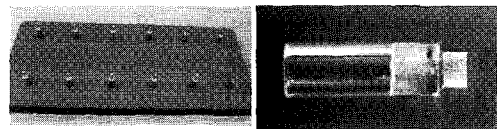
Jig for assembly(left) and manufactured sample (right)
